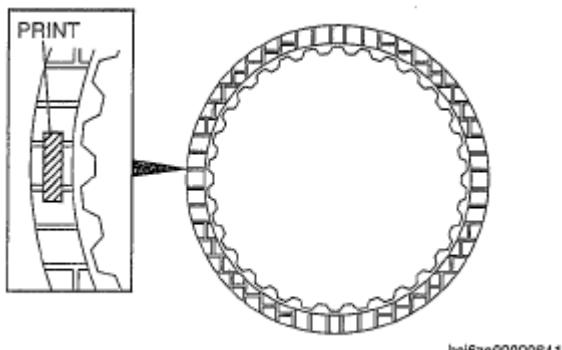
Identifying Print Mark On Drive Plates (C1)
